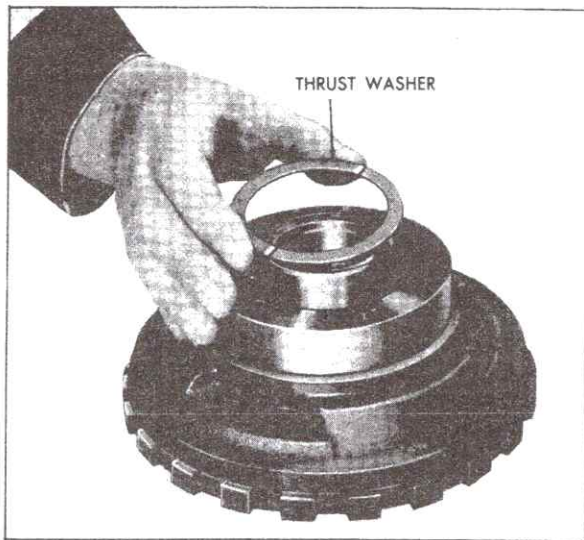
Removing Center Support to Reaction Carrier Thrust Washer
